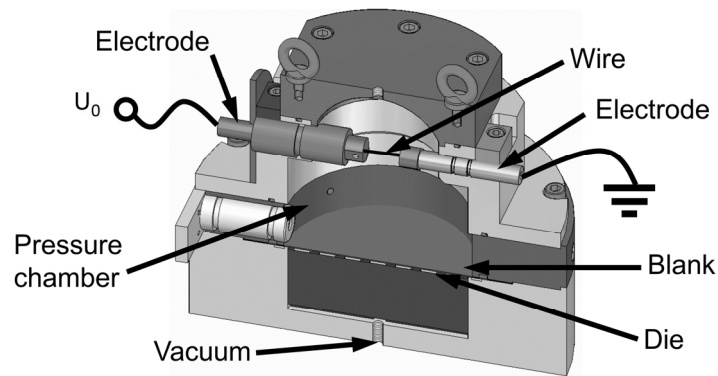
Cut-away of the current EHF-tool for forming blank materials
